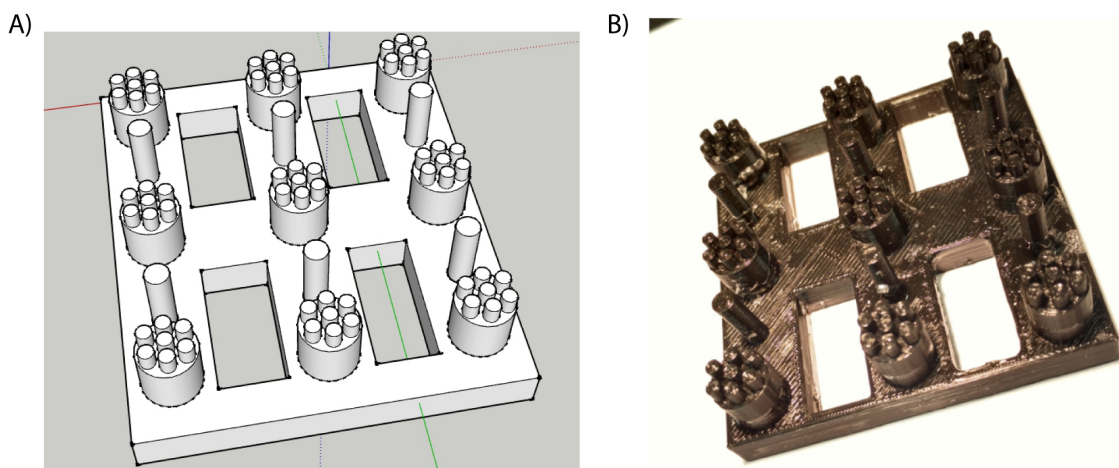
3D-CAD and PLA mold for electrochemical cell: A) the 3D-CAD drawn in SketchUp software. B) Picture of PLA mold printed in Makerbot 3D-printer.
